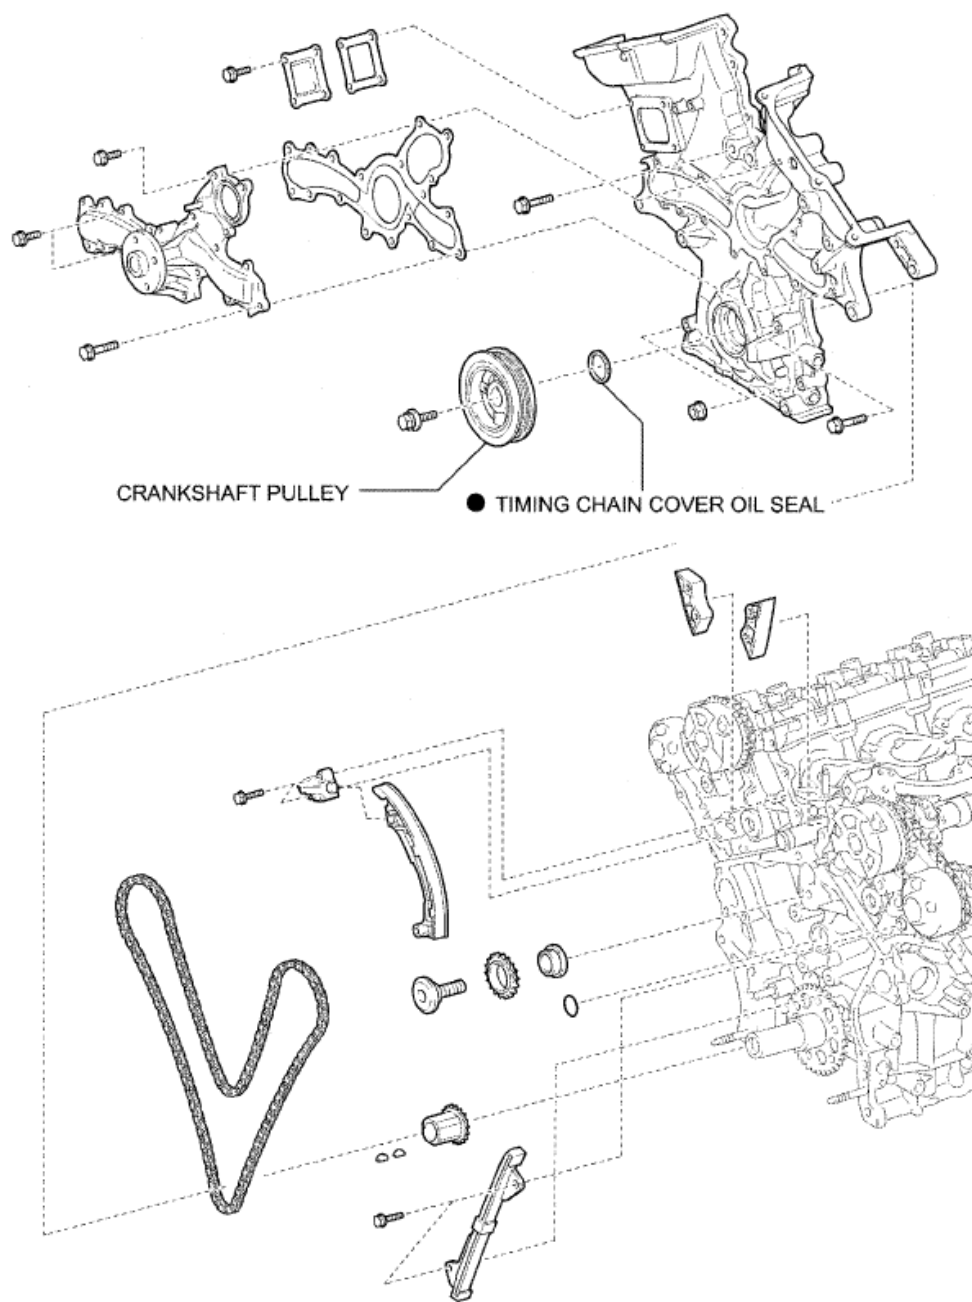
Identifying Engine Front Oil Seal Components (1 Of 3) View Of Drive Belt And Pulley
